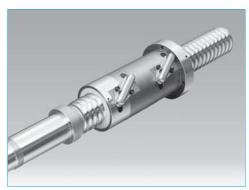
HTF-SRC type for high-load drive Page B123
